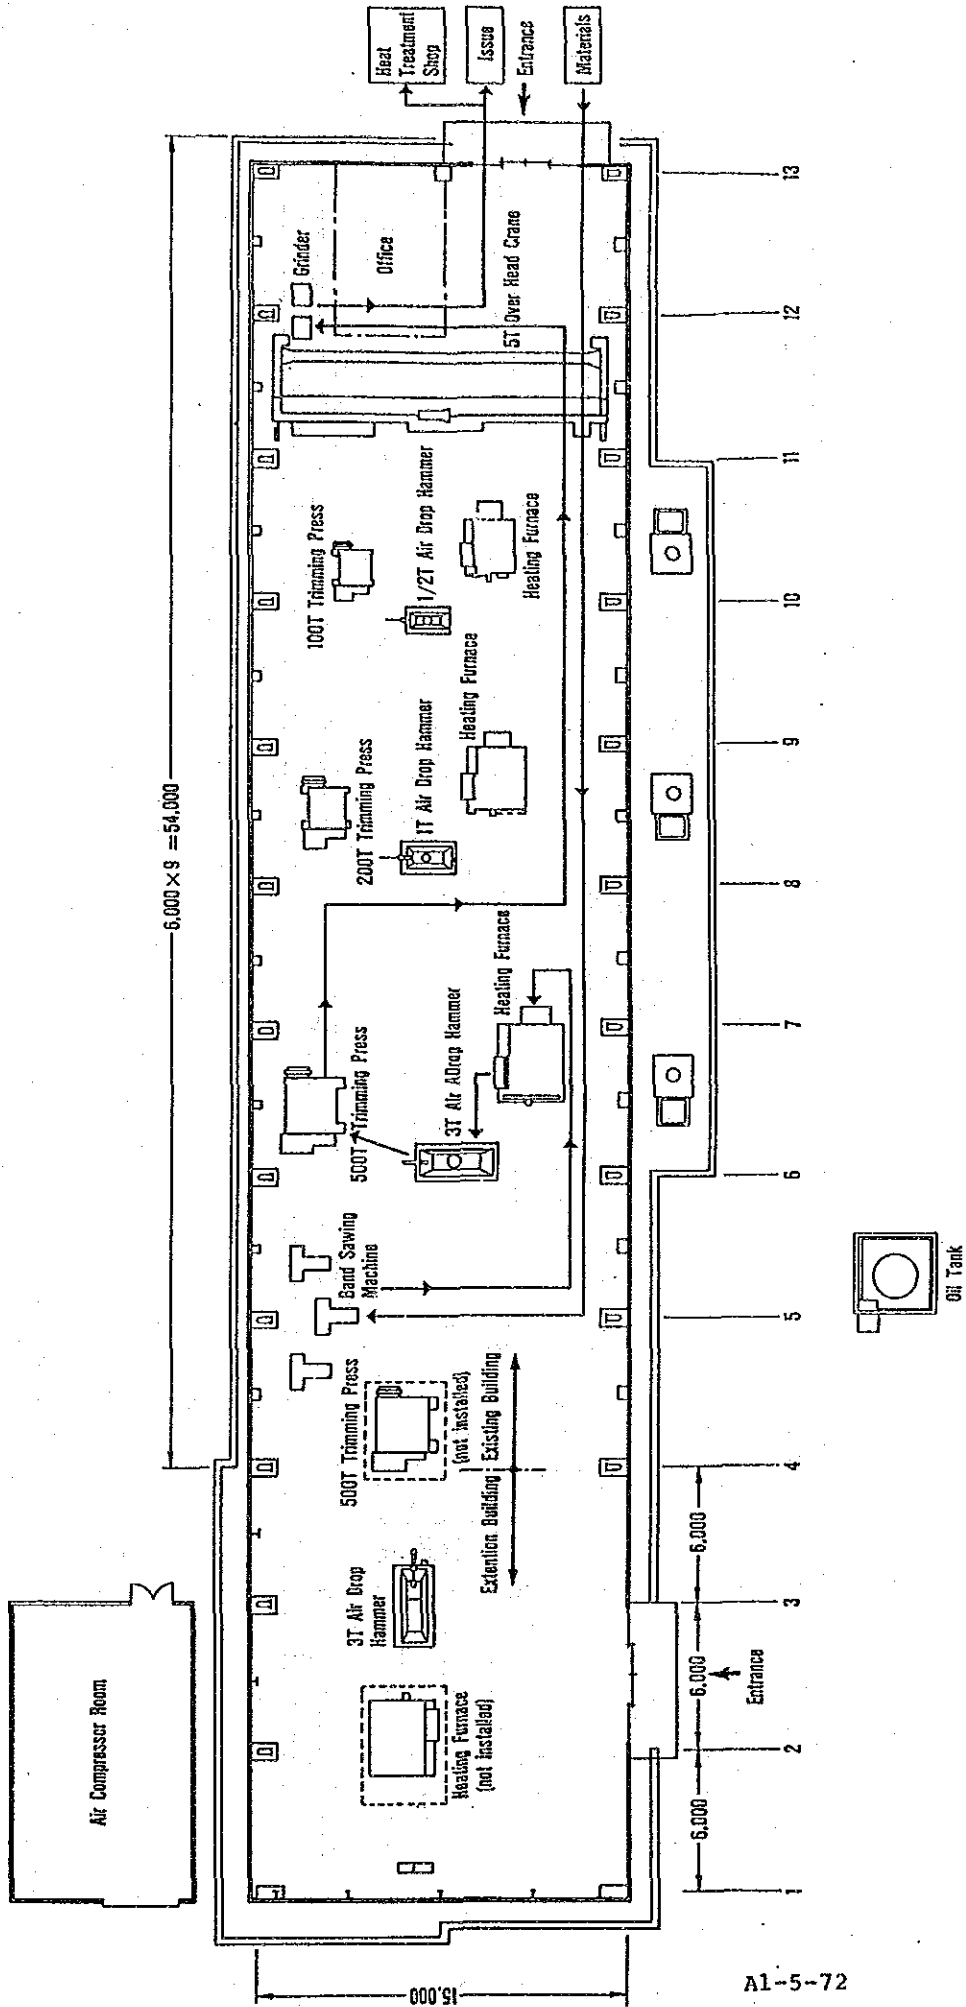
MACHINE LAYOUT PLAN OF HAND TOOL FORGHIG SHOP
